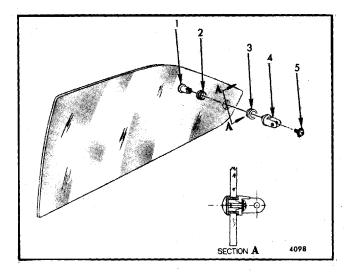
Optional Swing-Out Quarter Window Latch Assembly Support
